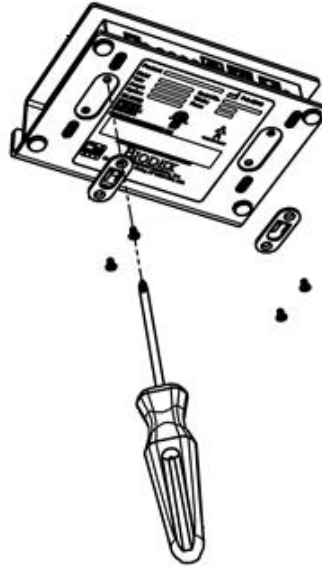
Removing Screws and Mounting Clips from Interface Module.
